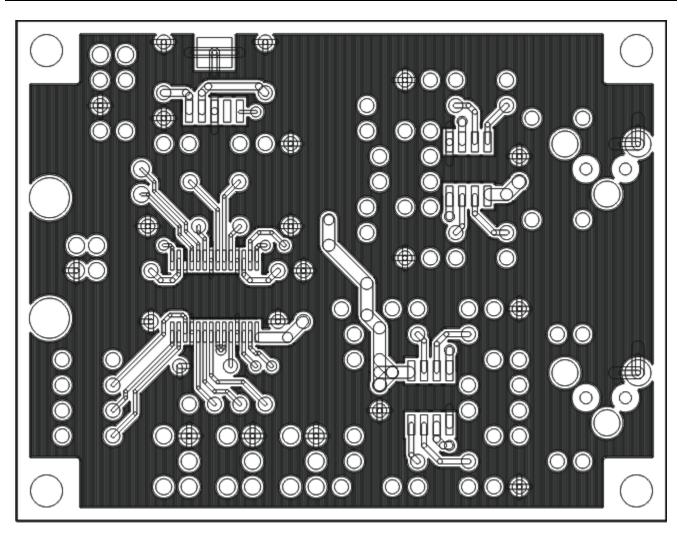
PCM2900CEVM/2902CEVM/2906CEVM-U Top View
